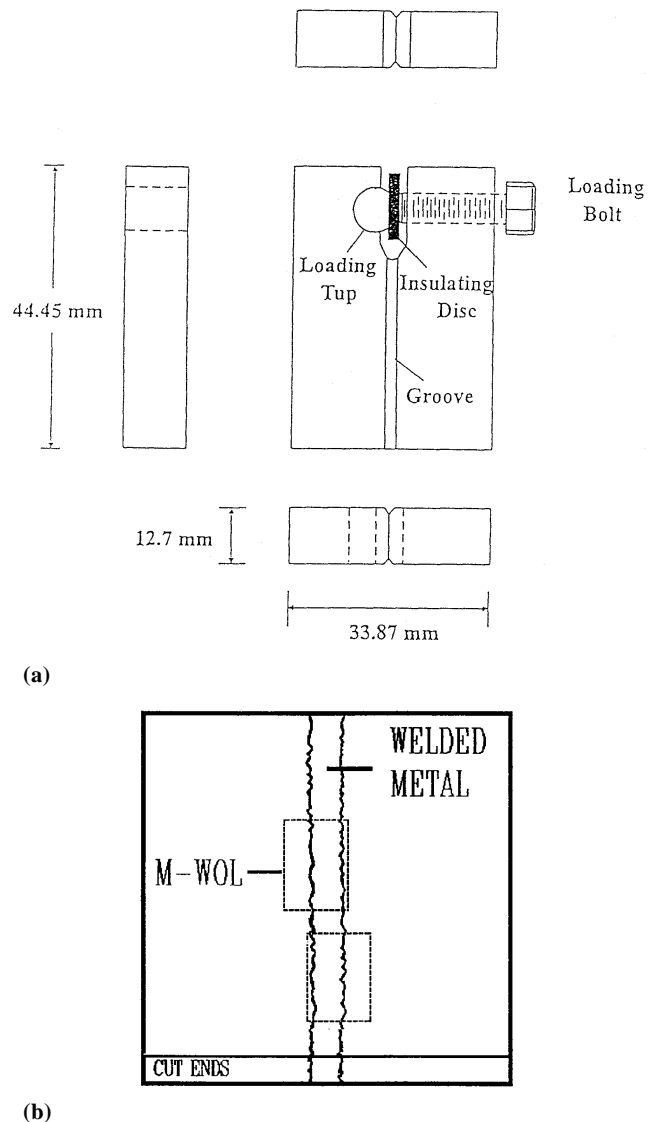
(a) Geometry and dimensions of M-WOL samples. (b) Layout of the samples taken from the welded plate
